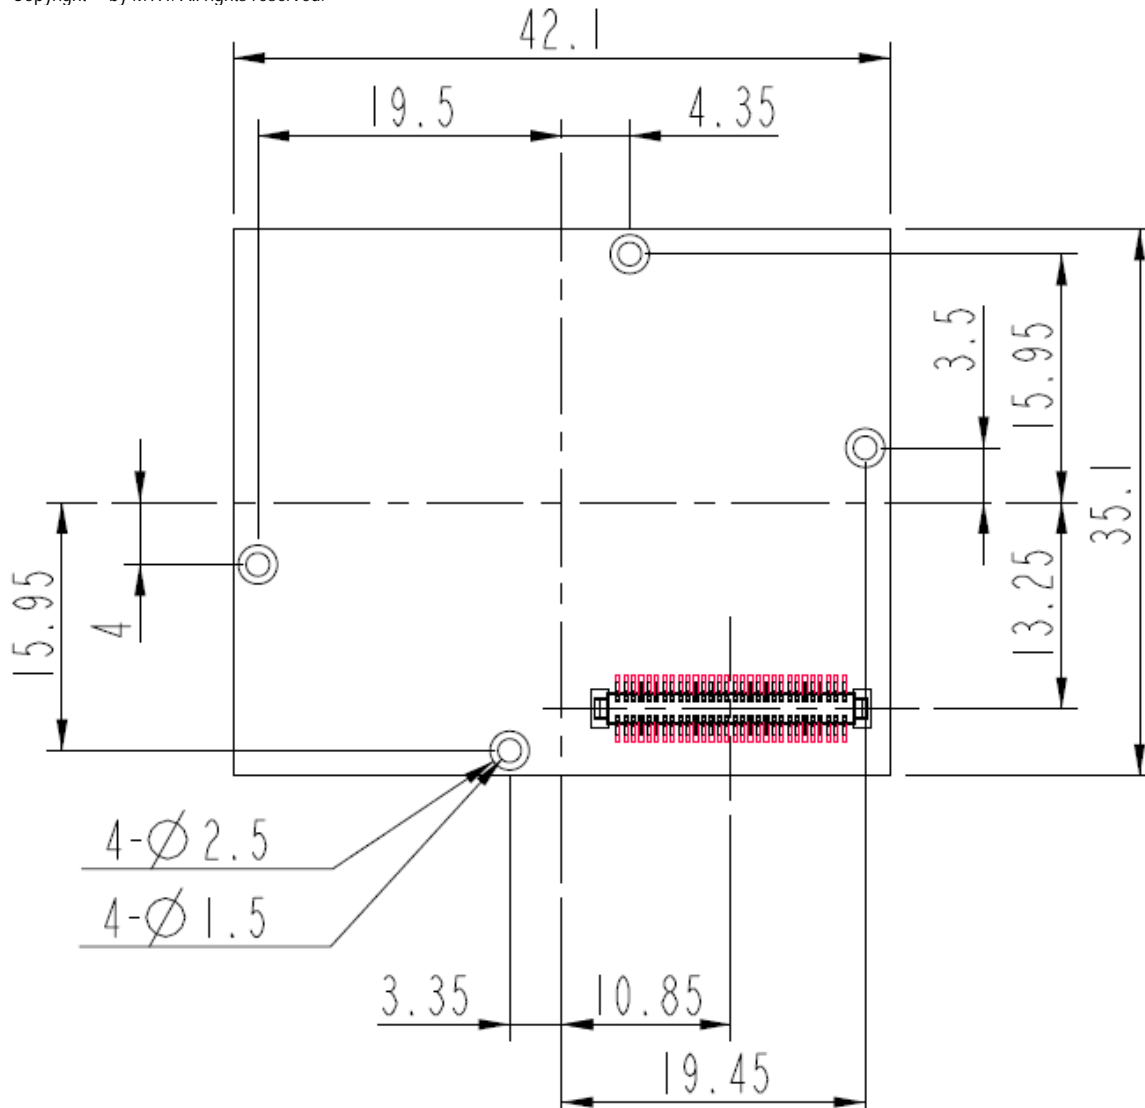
Top and Side mechanical dimension of MGM-312E (Unit: mm)
